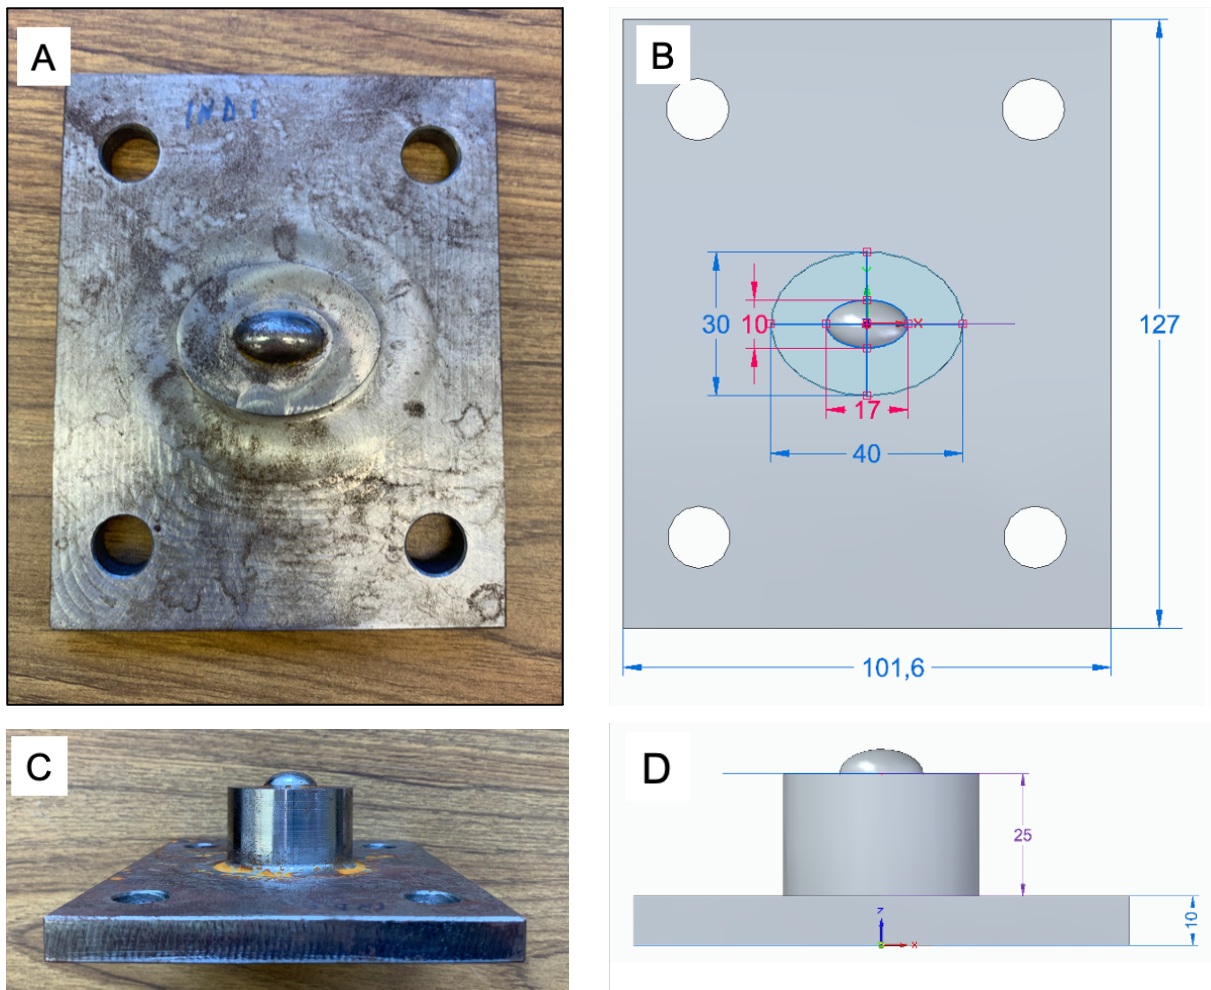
The fabricated indenter used for UCT testing. A) Superior view; B) Superior view dimensions (mm); C) Side view; D) Side view dimensions (mm).
